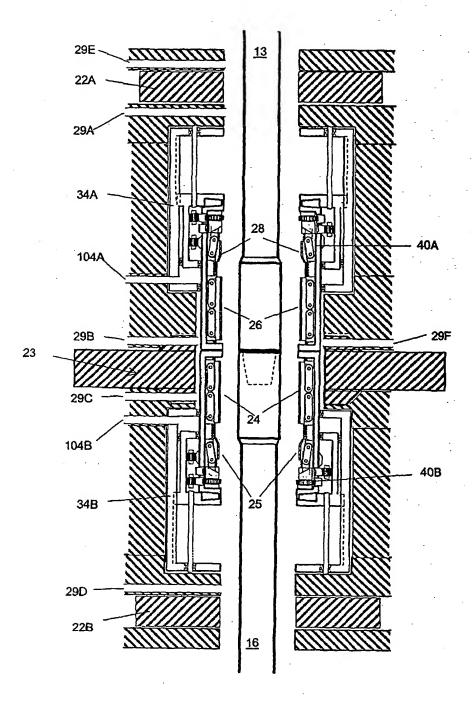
Coupler Assembly with internal Grips & Slips retracted
